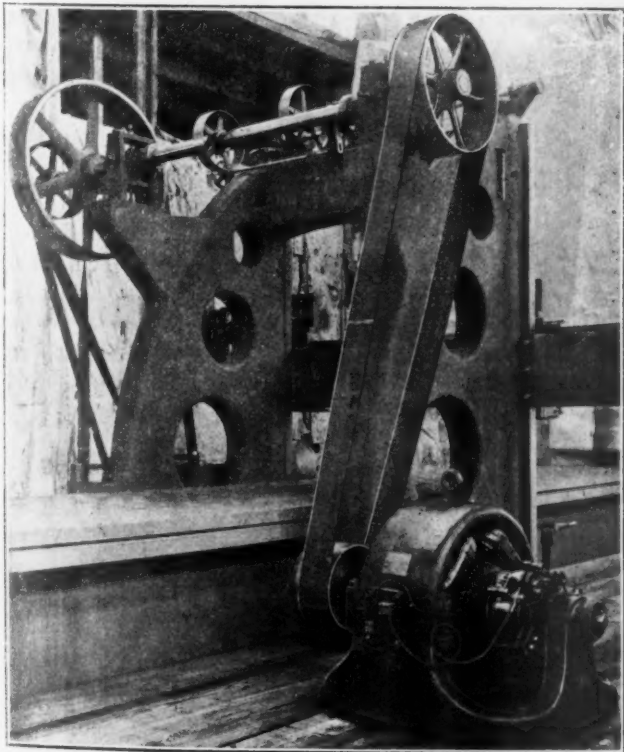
BELTED DRIVE UPON A PLANER BUILT BY THE BETTS MACHINE COMPANY, SHOWING USE OF FLYWHEEL.
